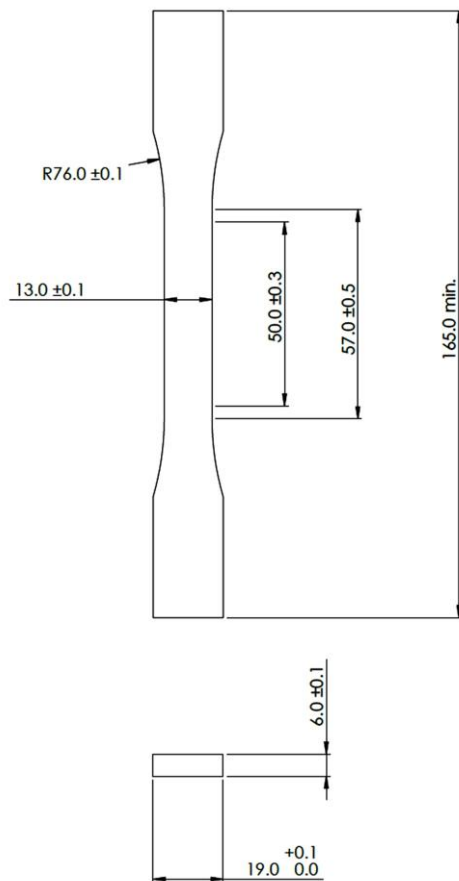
The geometry of the tensile test specimen (according to ASTM D-638-14)
